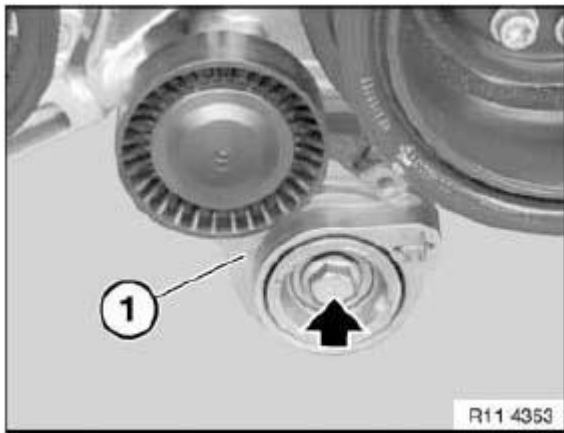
Identifying A/C Compressor Drive Belt Tensioner
